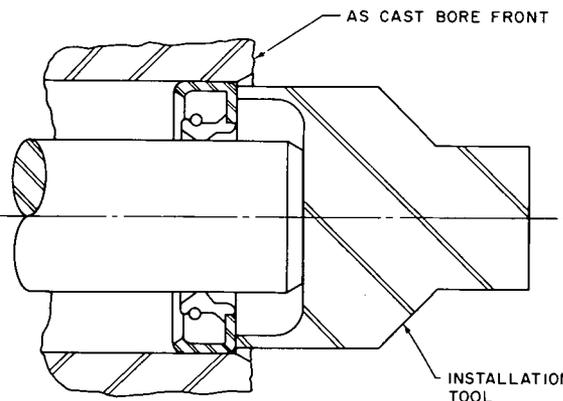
THROUGH BORE: INSTALLATION TOOL BOTTOMS ON SHAFT
